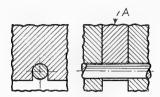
When swinging member A is to be removable, the bearing is cut as in the left view.
